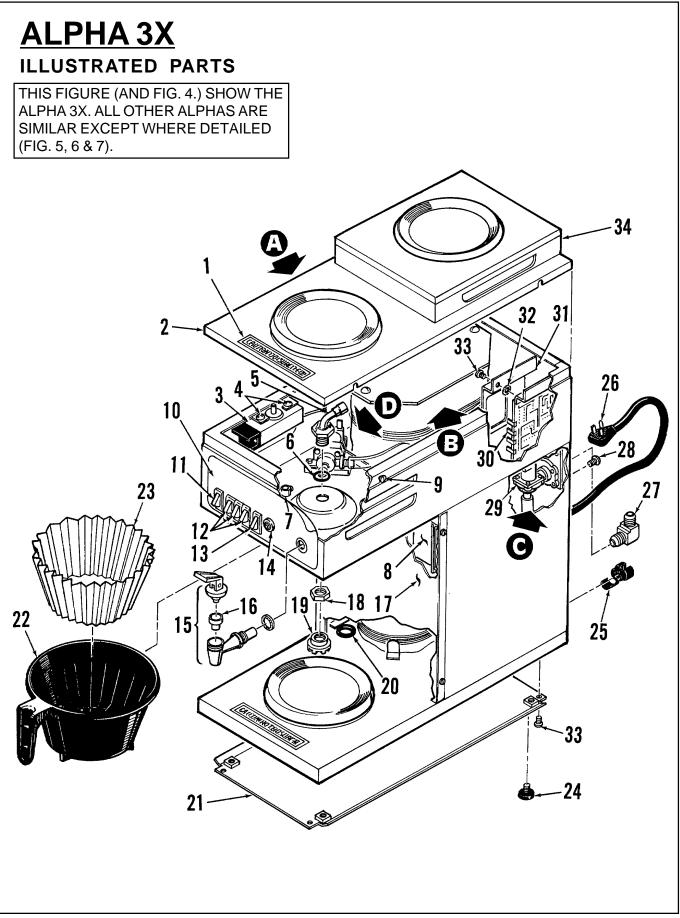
Illustrated Parts List, Main View (Alpha 3X Shown).
